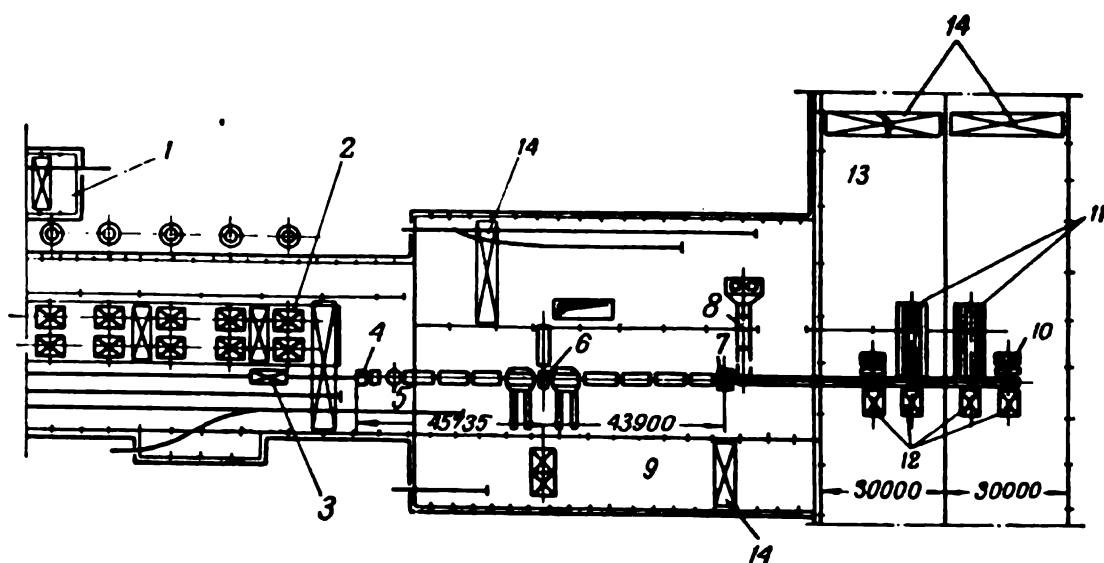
Layout of a modern 1150-mm single-stand blooming mill:
